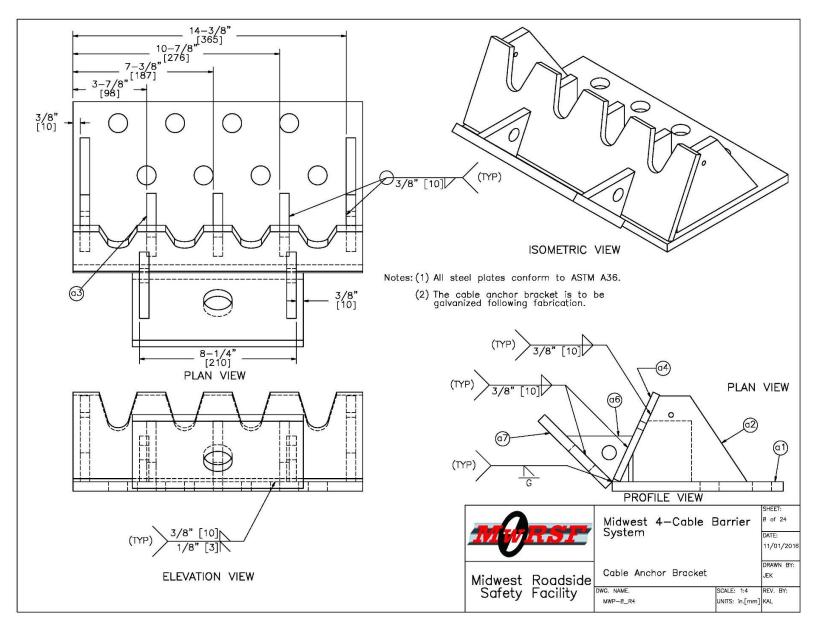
Cable Anchor Bracket, Test No. MWP-8
